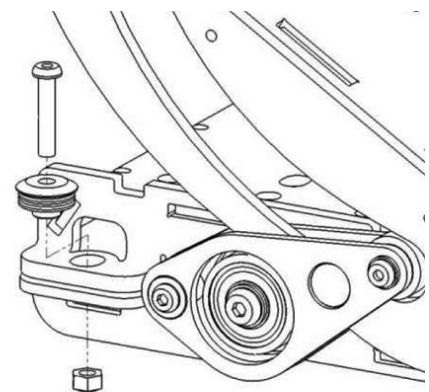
Mount the screws, spring washers and nuts on the left and right hand side.
